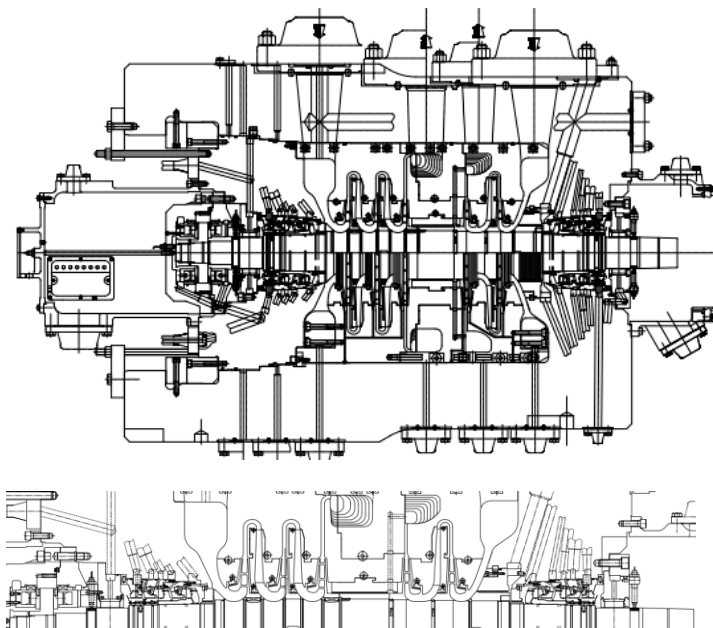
a) Centrifugal compressor cross section. b) Rotor detail
